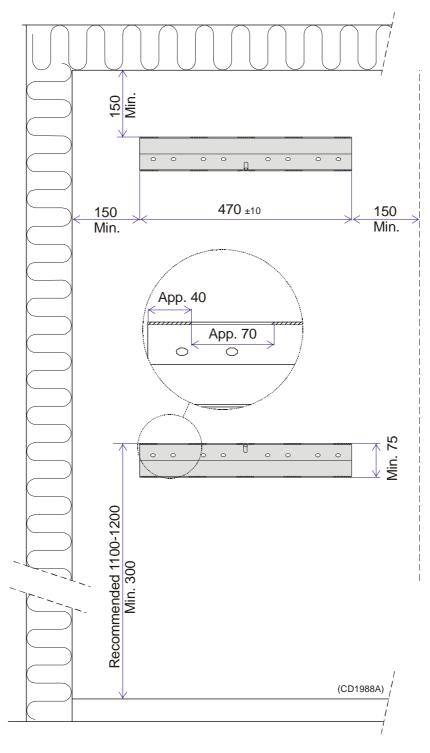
Mounting the brackets for the Transceiver Unit - Forward view
